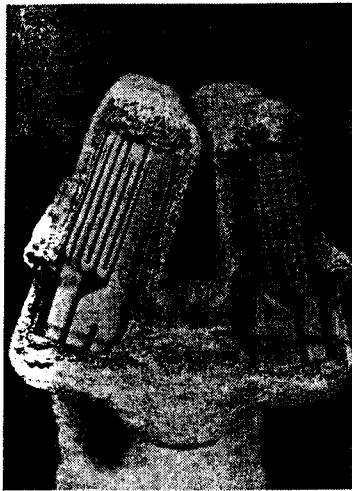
Cutaway view of a shell mold for an air-cooled turbine blade.
